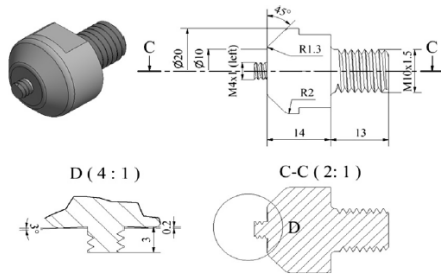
Geometry of the tool used for post-processing MIG\_NR + FSP specimens (dimensions in mm).
